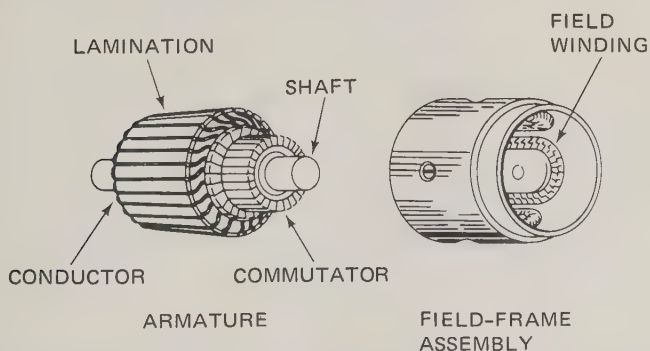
Two major parts of a starting motor: the armature and the field assembly. (Delco-Remy Division of General Motors Corporation)
